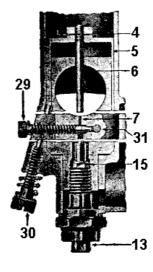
Section through Mixing Chamber, showing Air Valve and Throttle closed
